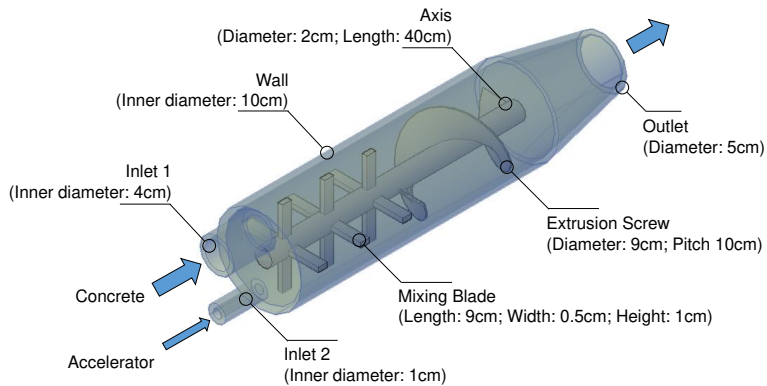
A dynamic mixer consisting of blades and screw system, taken from [124].
